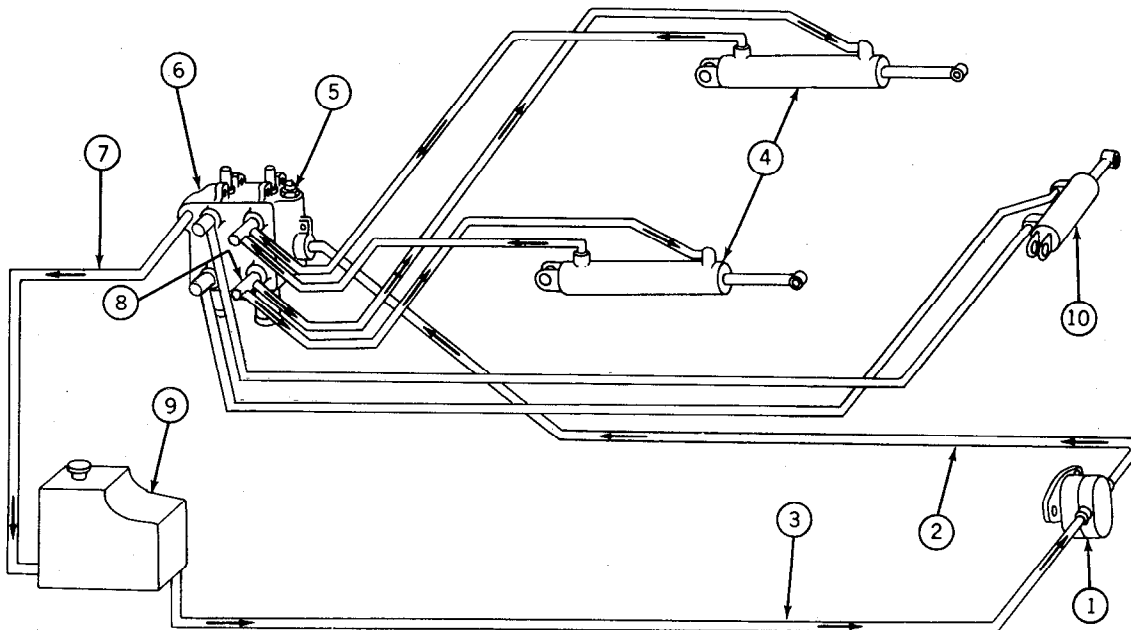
Bulldozer Equipped with Backhoe, 345 Rotoboom or Midwestern Sideboom
